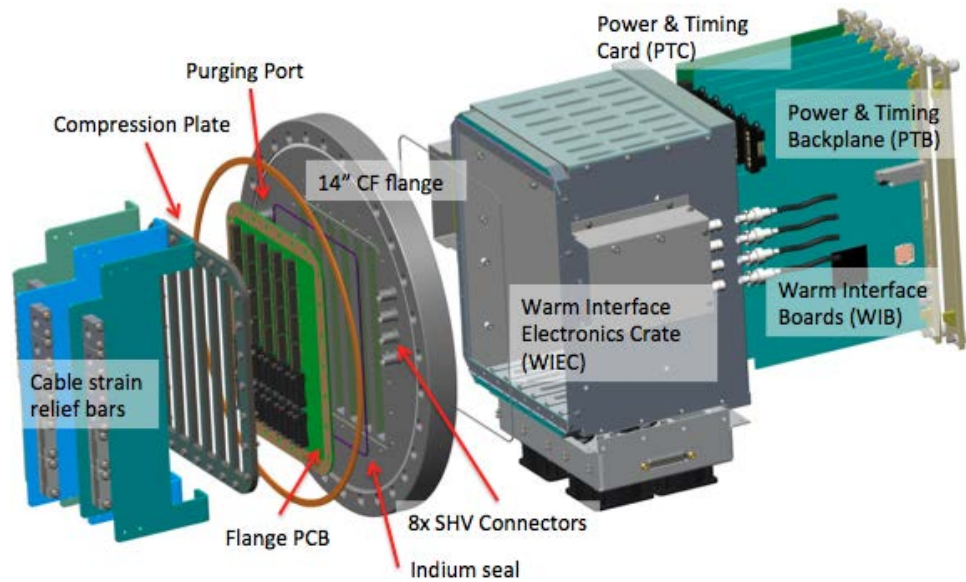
Exploded view of the CE signal flange for ProtoDUNE-SP. The design for the DUNE SP module CE signal flange will be very similar (with two CE signal flanges per feedthrough).
